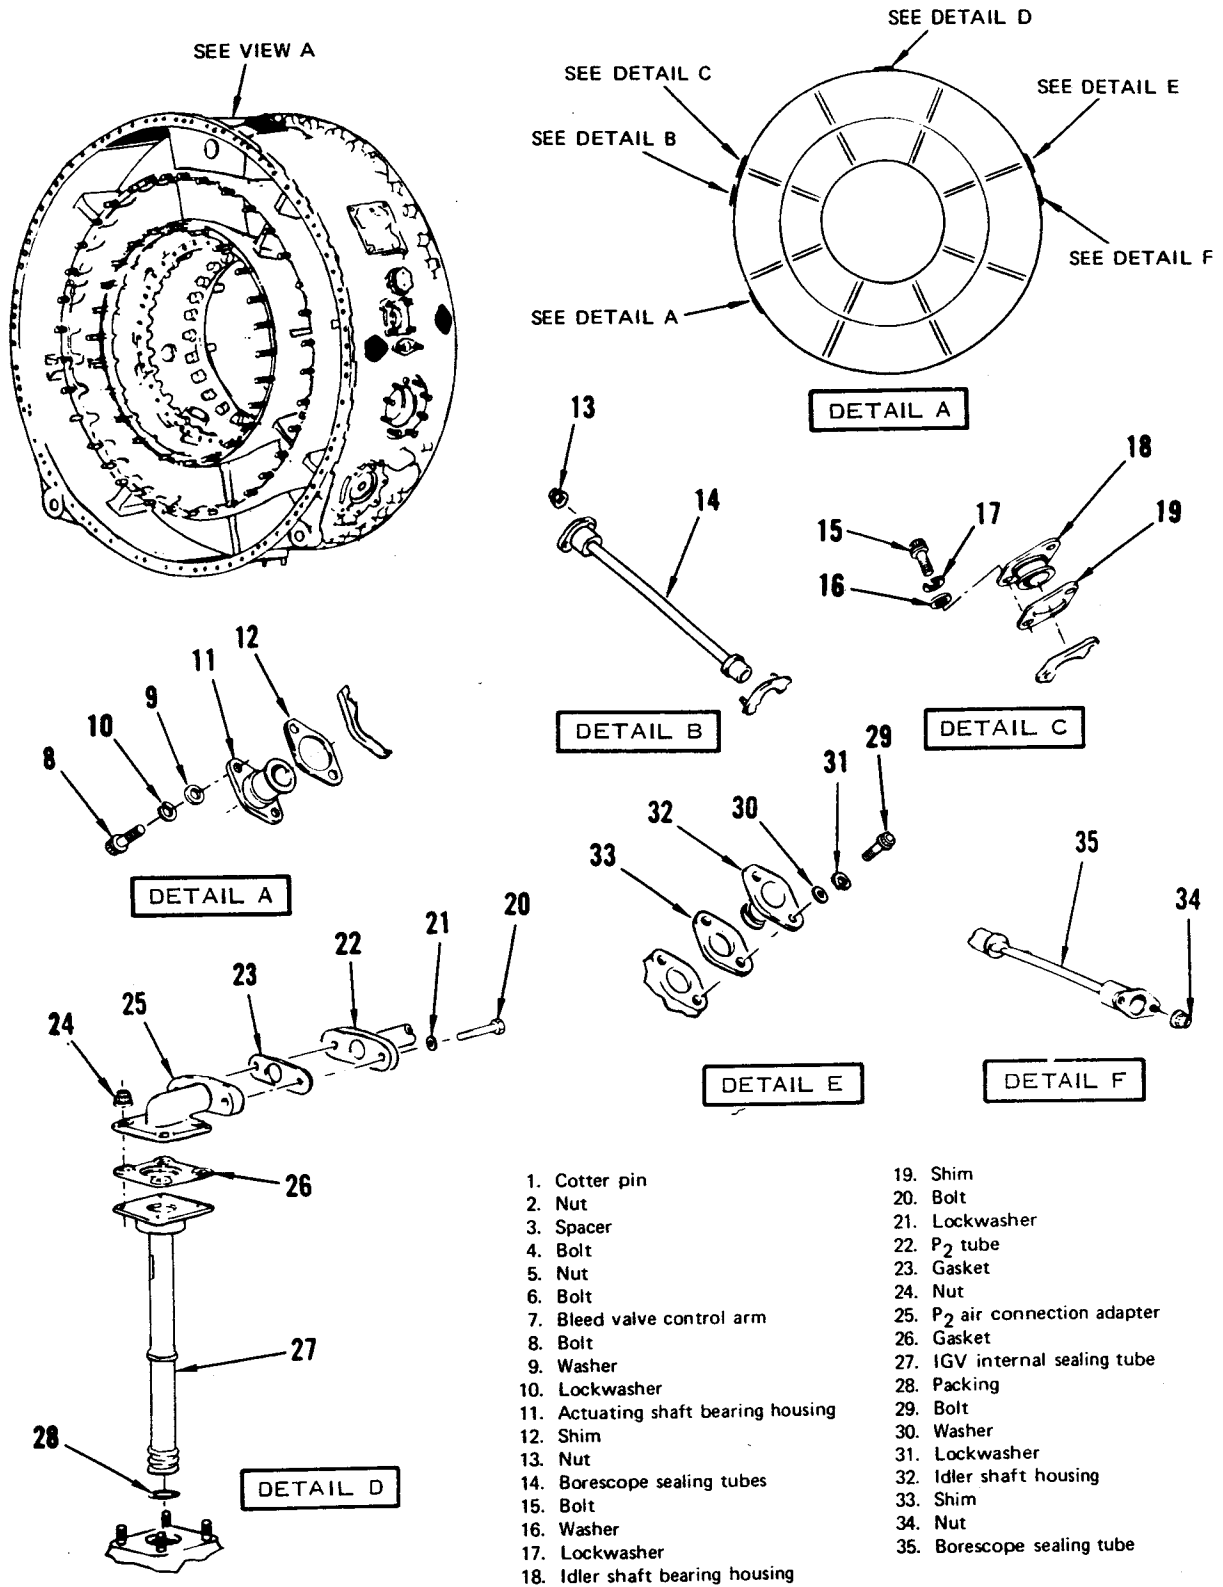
Cleaning; Bleed Valve Linkage (Sheet 1 of 2)
